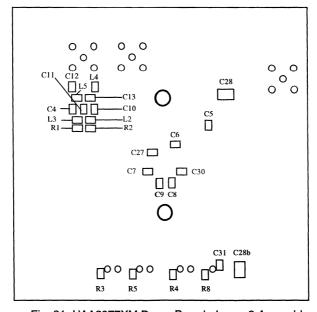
UAA2077XM Demo Board - Layer 2 Assembly
